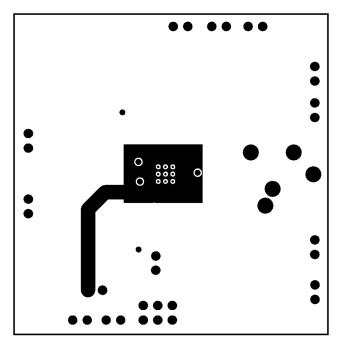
Recommended UQFN PCB Layout: Mid Layer
